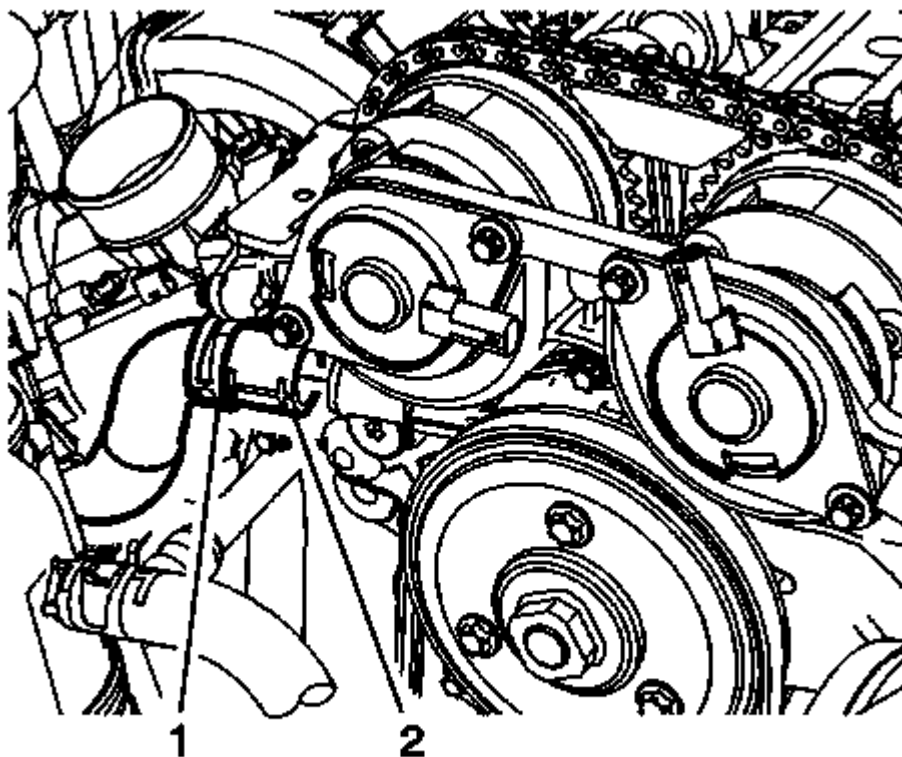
Heater Water Shutoff Valve Inlet Hose And Clamp
